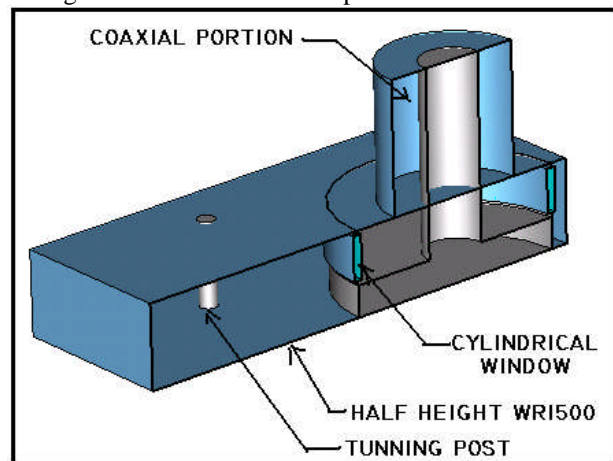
Cylindrical window in half height WR1800 with tuning post and Chamfered at short wall corners.
